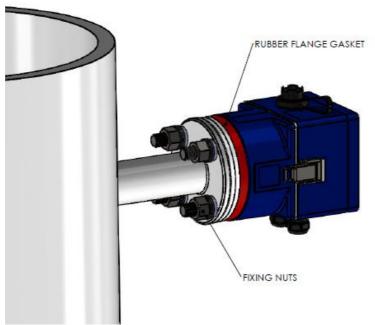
Air-Purge Body mounted to flange with the rubber flange gasket
